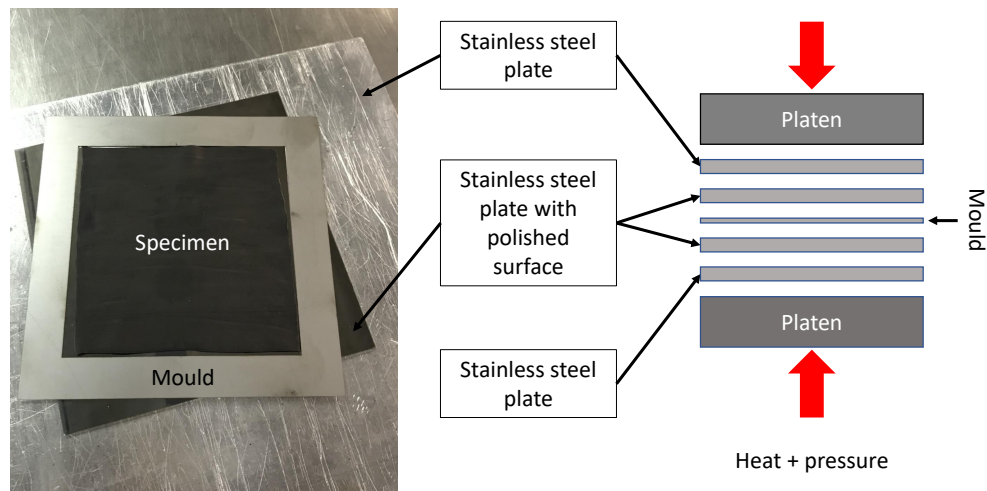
Compression moulding setup. An image of a rolled sheet of rubber of dimensions similar to that of the mould cavity, above two stainless steel layers is also illustrated here. The stainless steel surface in contact with the rubber is polished.
